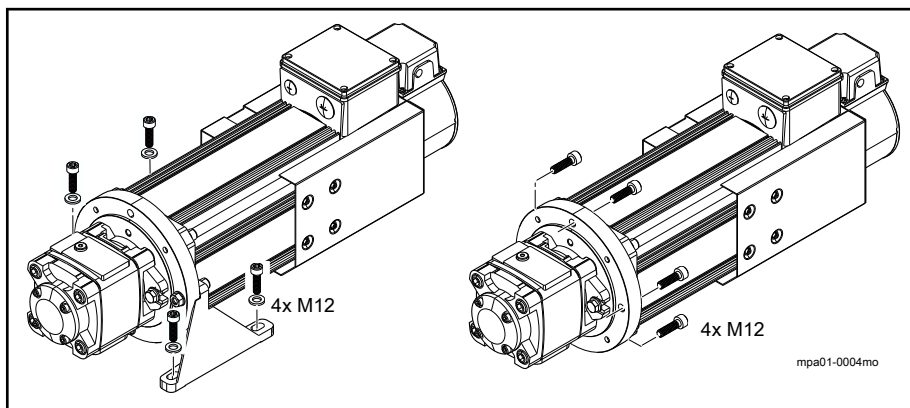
Assemble motor-pump unit MPA01 into the construction.
